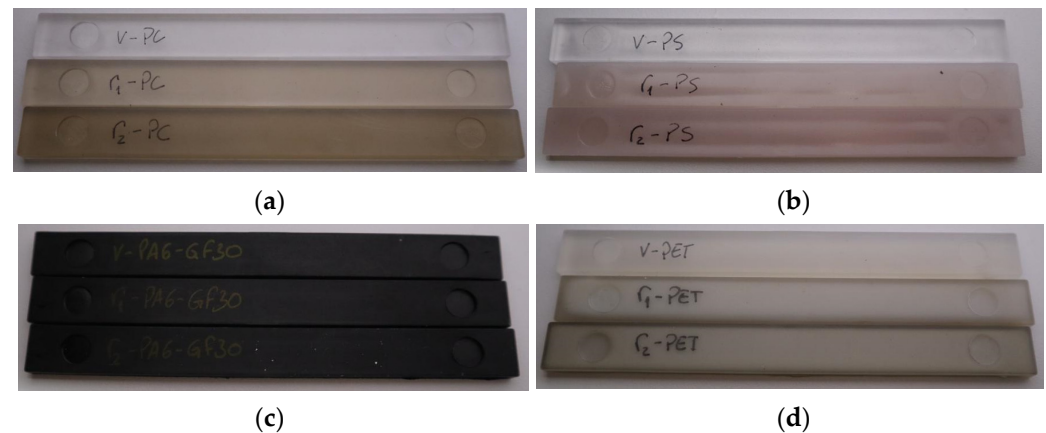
Examples of the injection-moulded specimens: (a) PC; (b) PS; (c) PA6-GF30; (d) PET.
